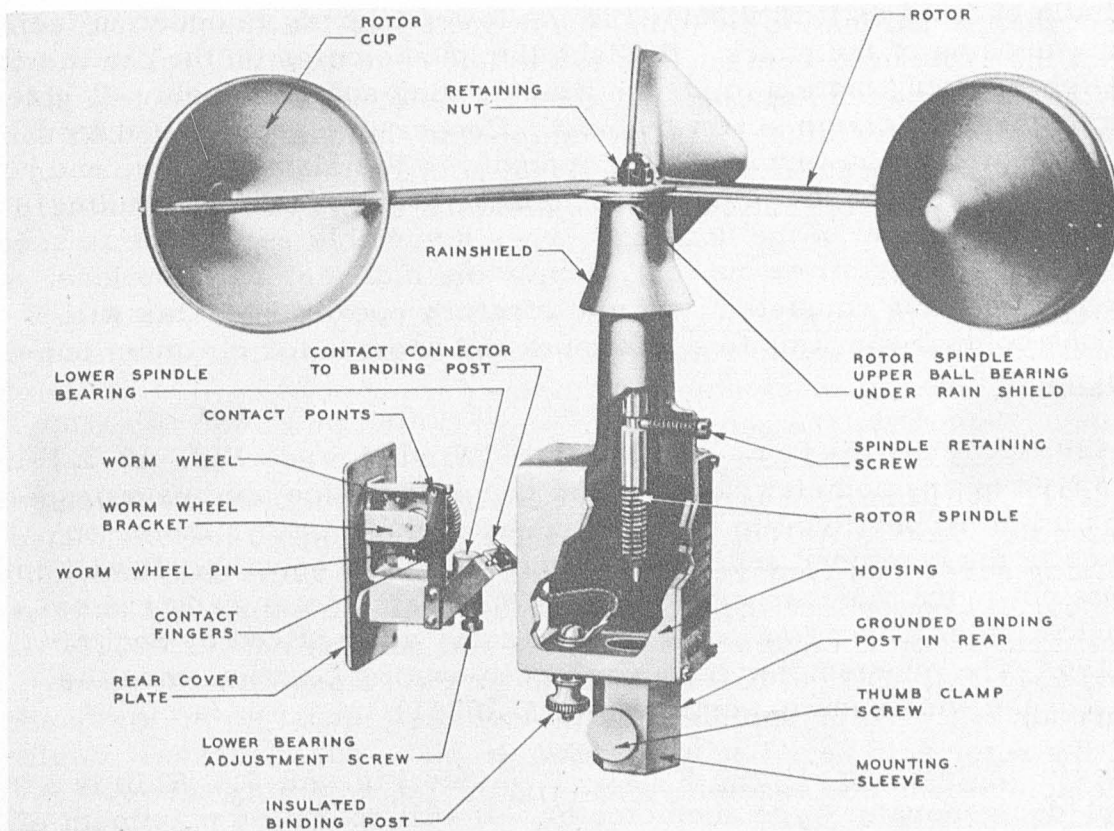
Three-cup anemometer, 2-7/8-inch diameter cups, 1/60-mile contact, F103.
